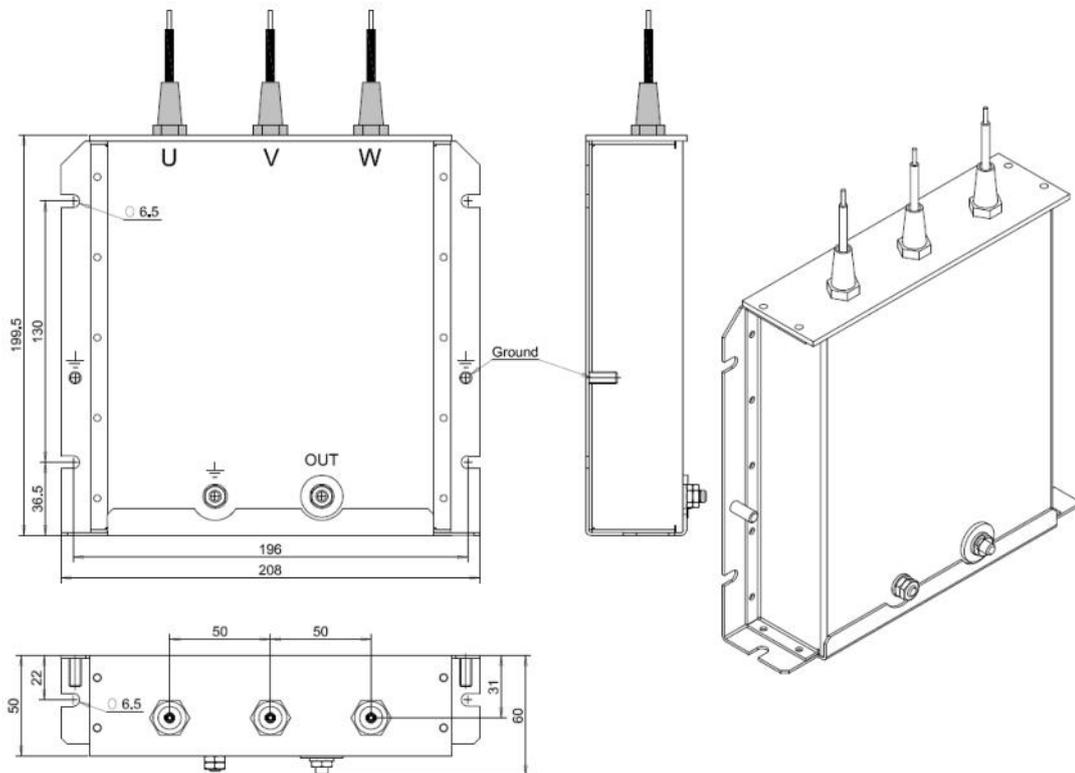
RU-7, Resistor Unit – Dimensional Drawing
